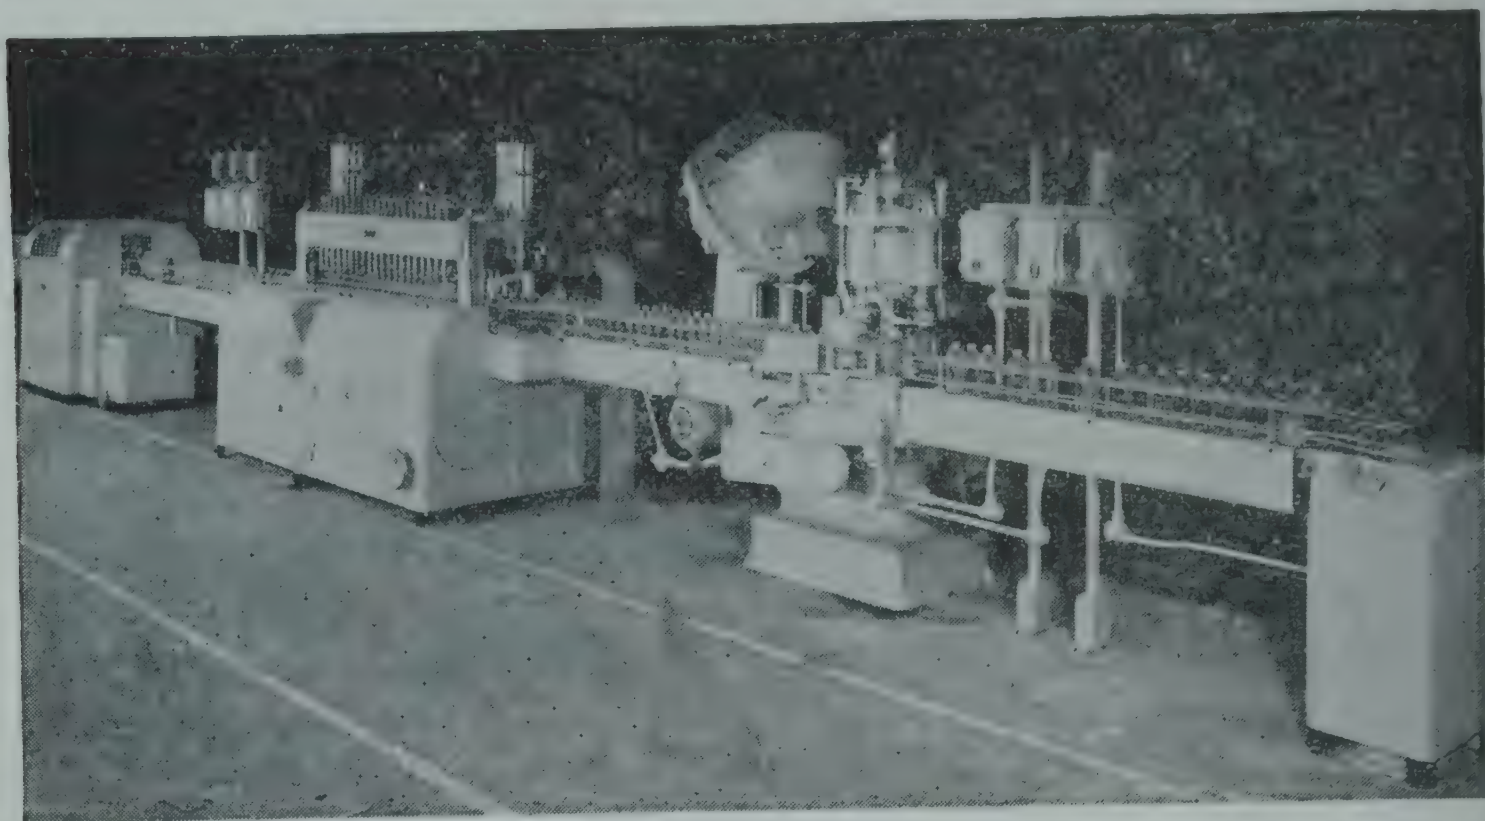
Automatic bottling assembly with air cleaner, straight-line vacuum filler, and four-head rotary capper. (*Pneumatic Scale Corp.*)
